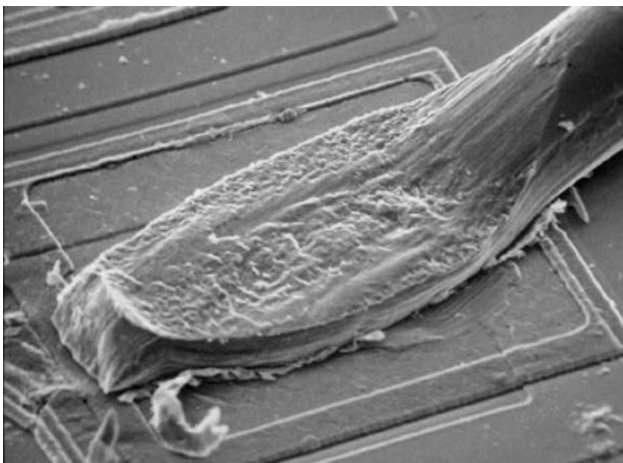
Slightly deformed bond surface caused by using a wedge with aluminum build-up. A similar appearance may be caused by a worn wedge.
